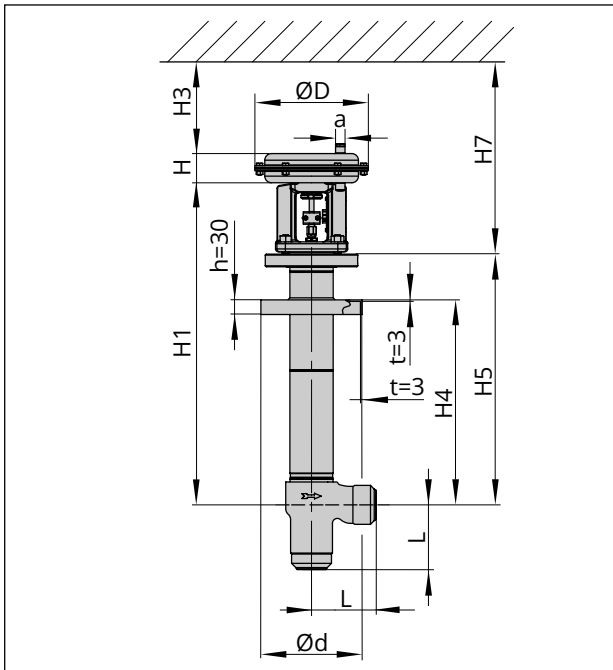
Type 3248#1 Angle Valve with stainless steel body
